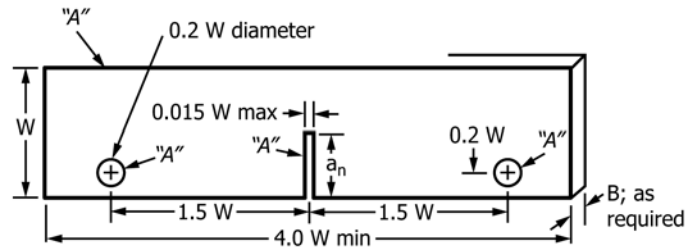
Test Arrangement for Translaminar Fracture Toughness Tests
